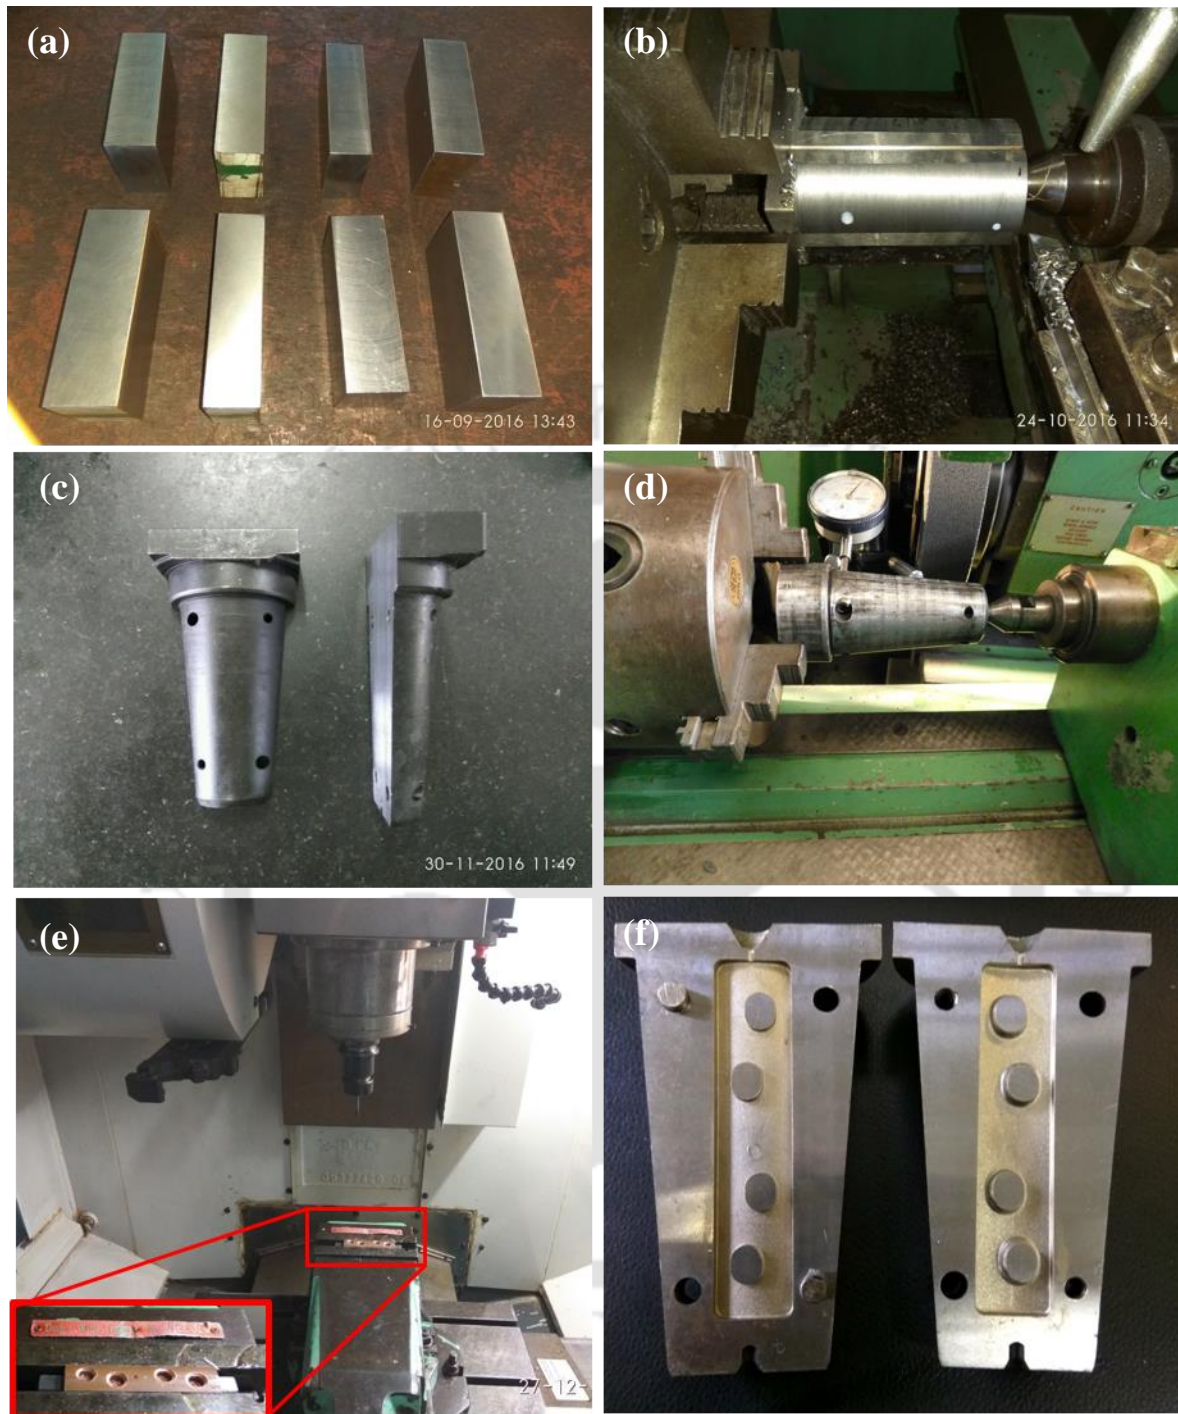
(a) H13 metals in form of raw materials (b) machining to the lathe machines for giving shapes as per the injection molding machine mold cavity (c) Heat treatment of the H13 metal (d) Cylindrical turning of the heat treated mould (e) Bone plate electrode made of copper (f) Bone plate mold in final shape.
